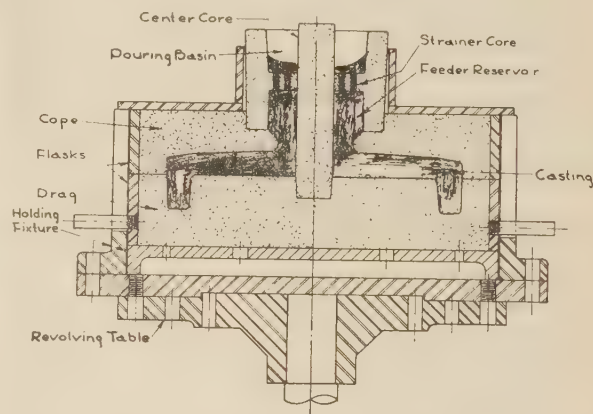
SEMICENTRIFUGAL CASTING OF FLYWHEEL WITH CENTER CAVITY
